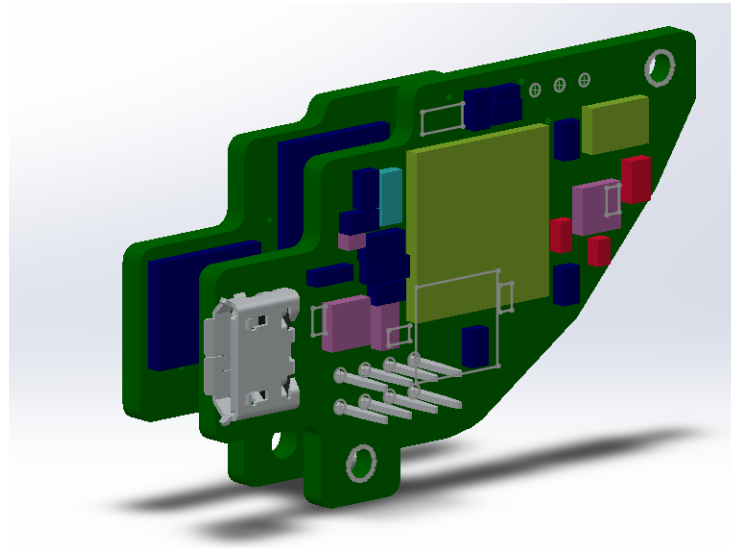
3D view Representing both Endoscopy Control Handle Boards Mounted Together
